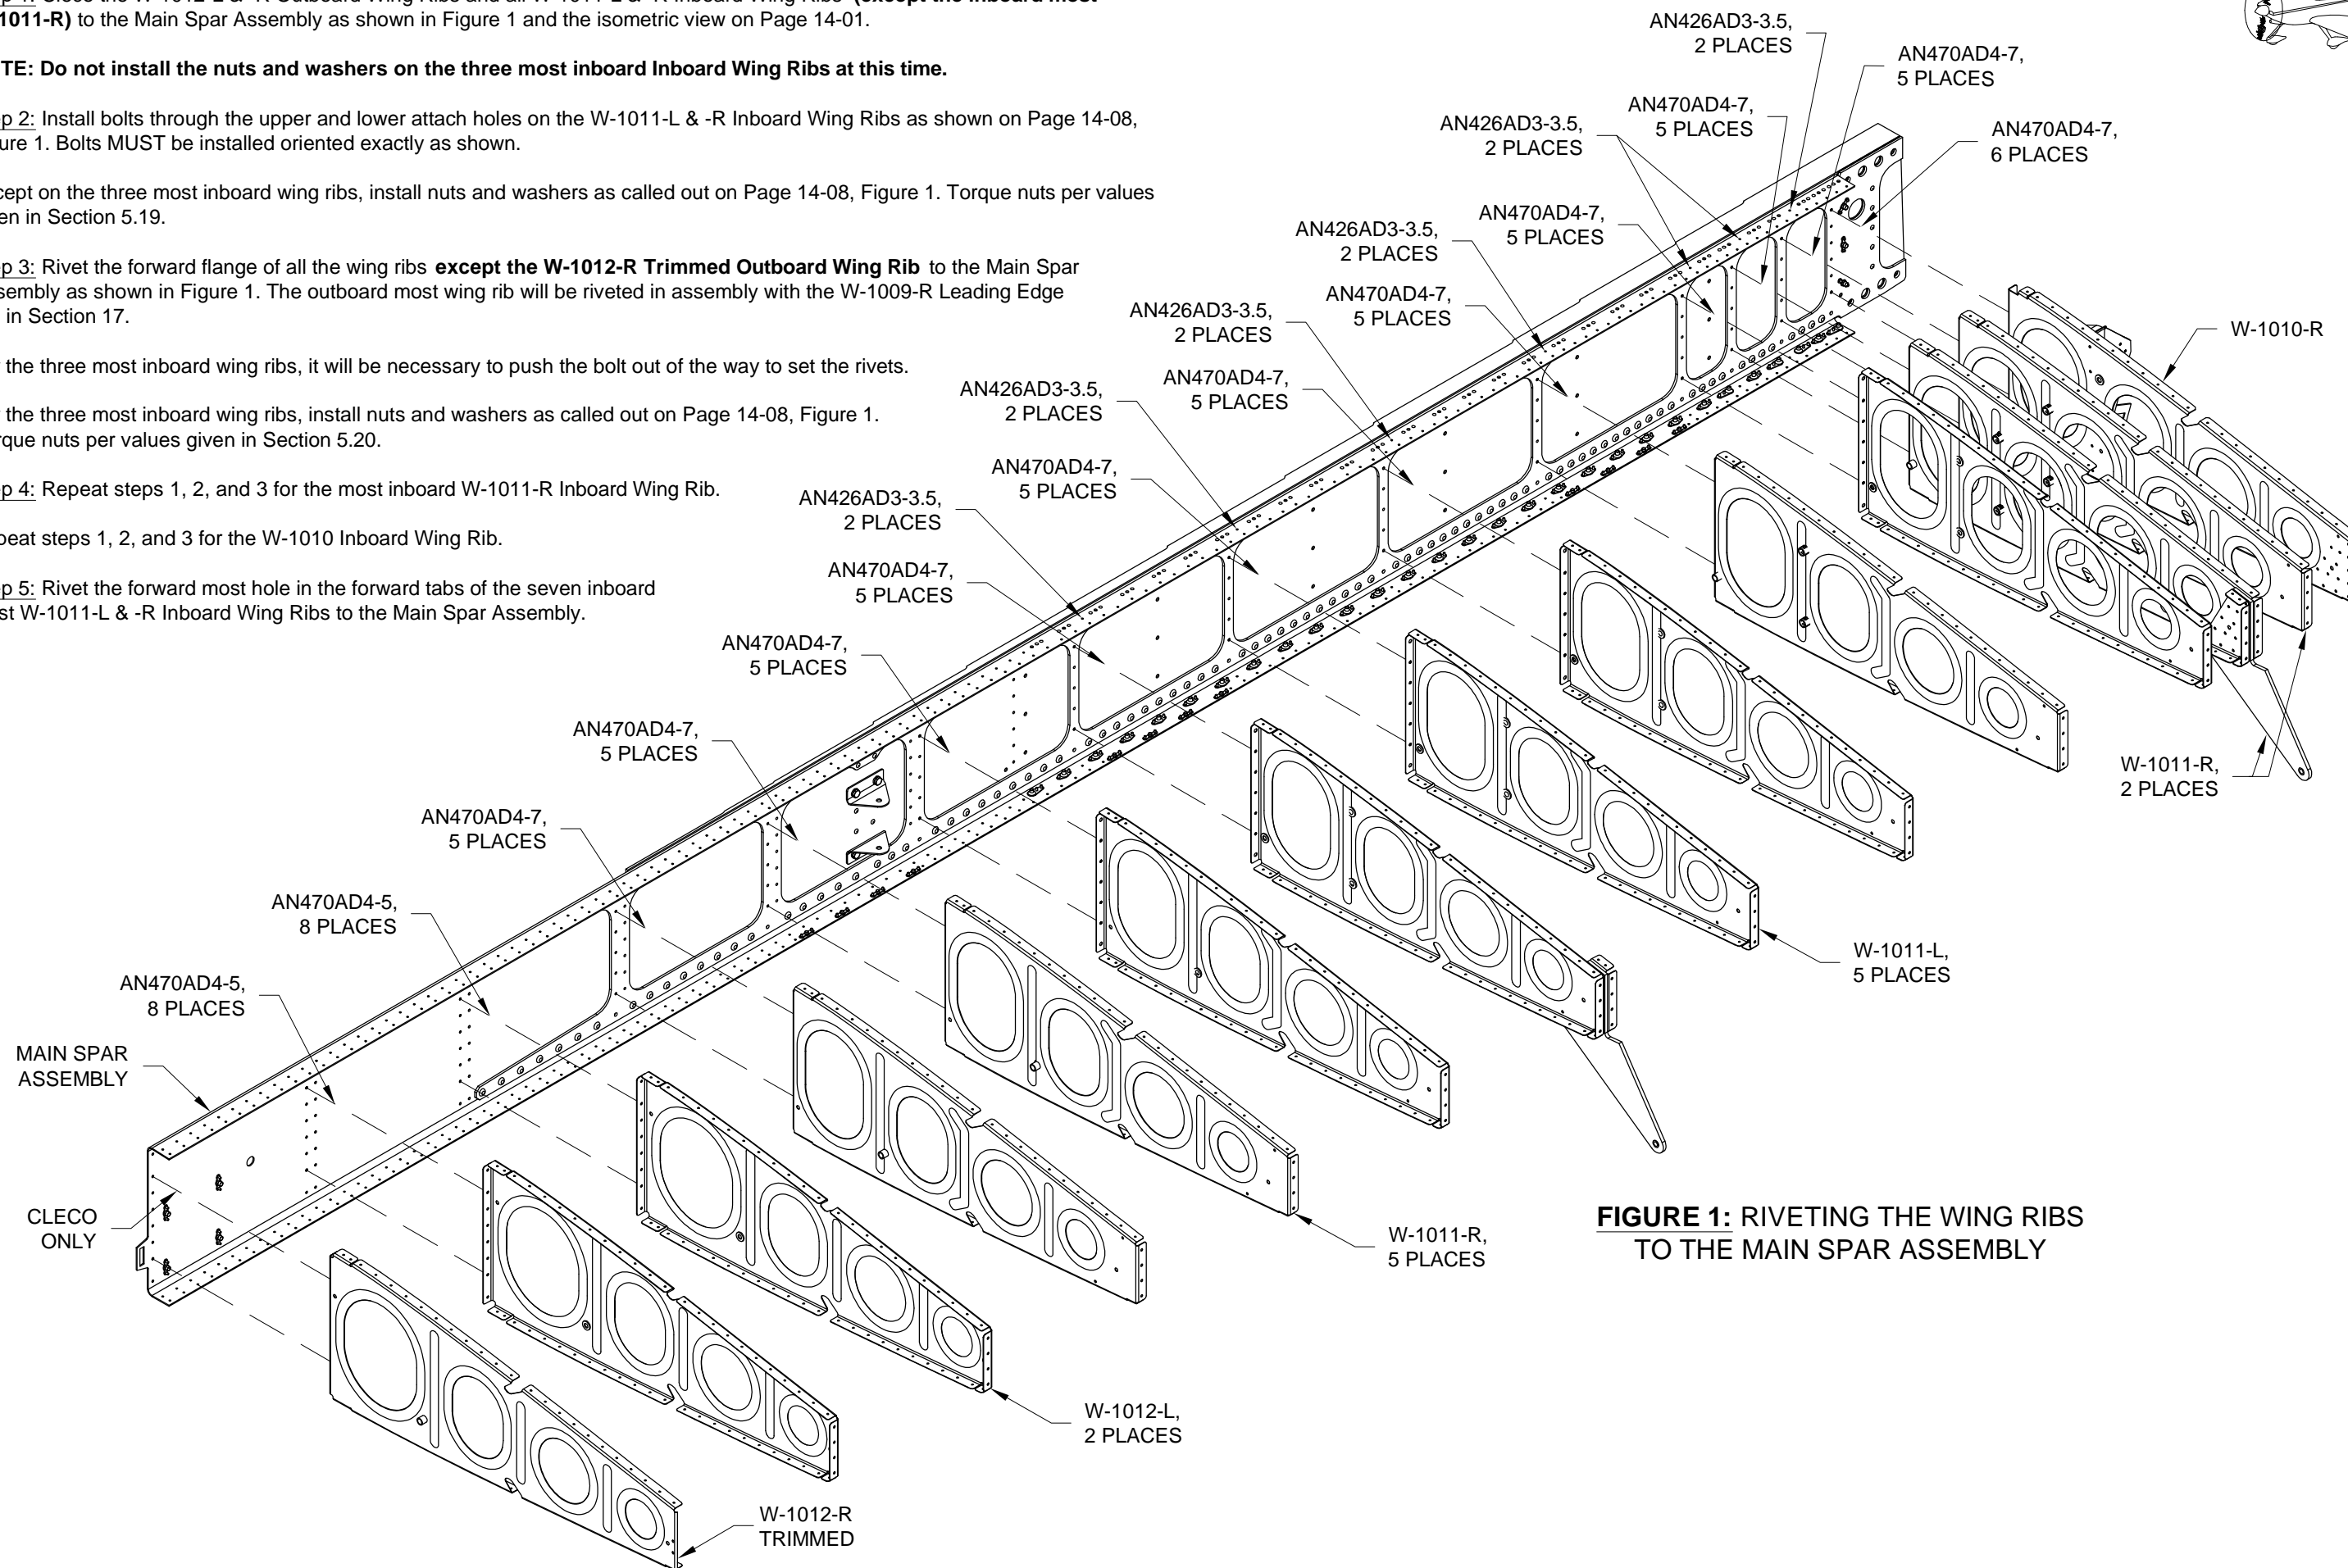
RIVETING THE WING RIBS TO THE MAIN SPAR ASSEMBLY
